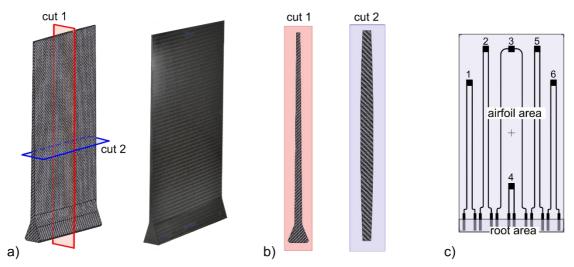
a) CAD design (left) and manufacturing example (right) of a generic fan blade specimen with integrated TEmSAL, b) cross sectional cuts of the generic blade, c) sensor layer design and positioning of the piezo elements within the generic fan blade specimen
